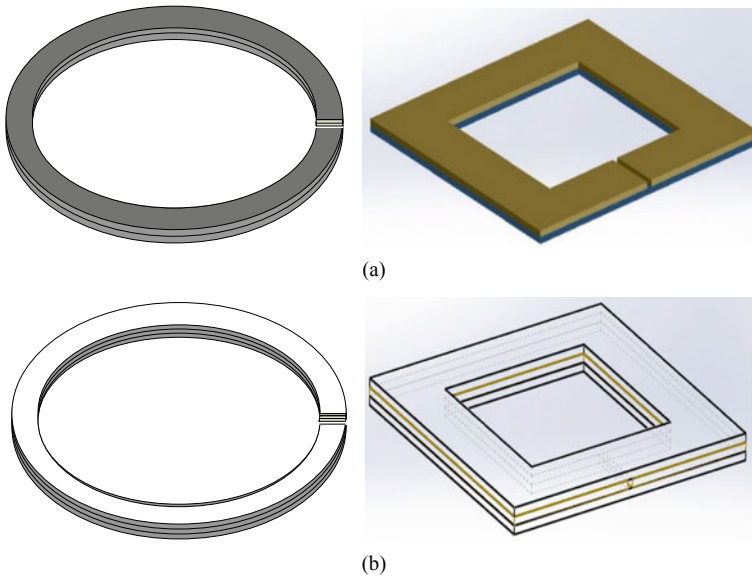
Test verification models for MS and joint forms experiments, a the two pieces of ring type and frame type sheet models with joints; b the three pieces of ring type and frame type sheet models with joints
